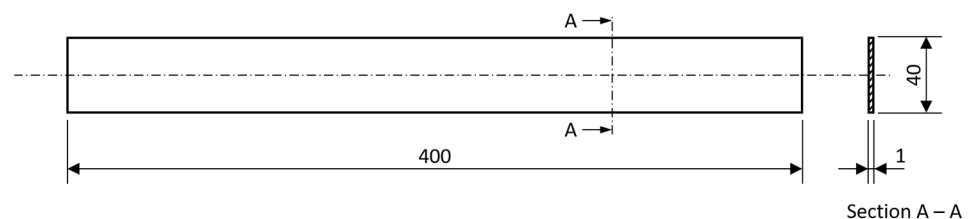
Specimen for four point bending tests (all dimensions in mm).
